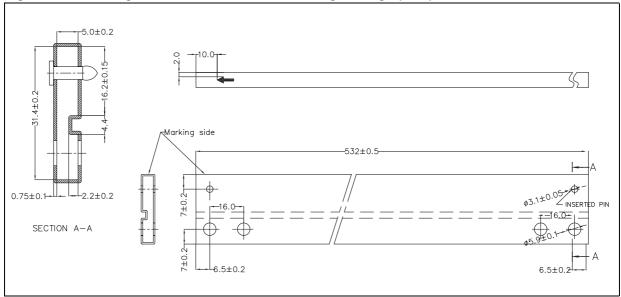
Drawing dimension TO-220 (type STD-ST Single Gauge)
